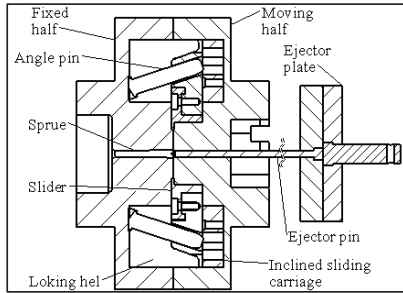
Cross section of the mould, including the angle pin slide activator.
